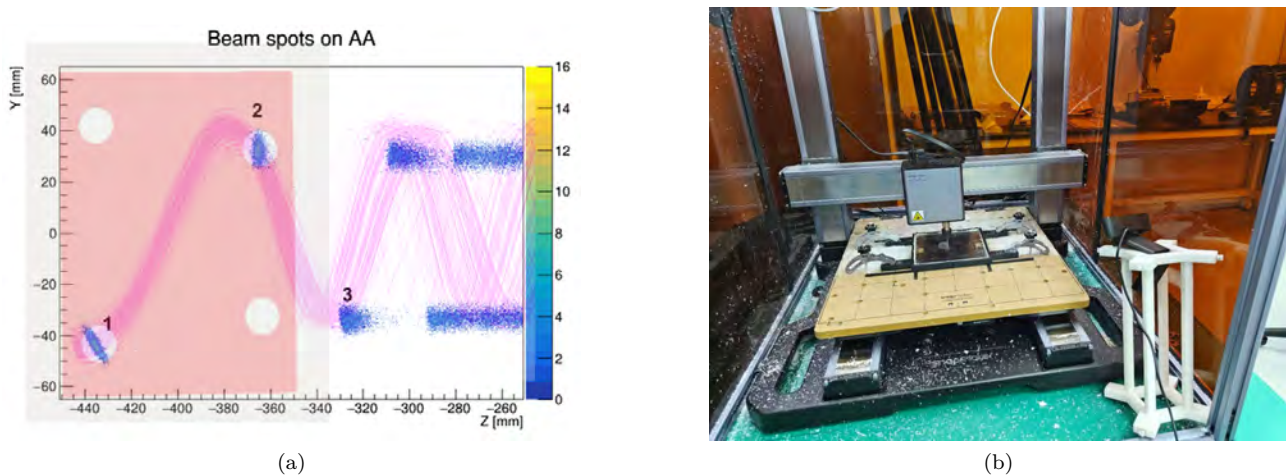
a) Obtaining dimensions and geometry of Aperture with simulation, red overlay illustrating the Aperture scintillator; b) fabrication of Aperture openings with CNC cutting machine.
